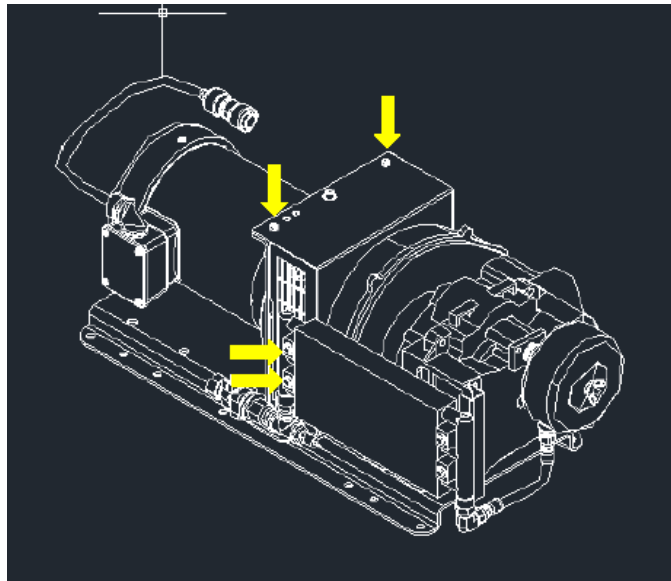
Coupling Guard & After Cooler Support Block Screw locations.
